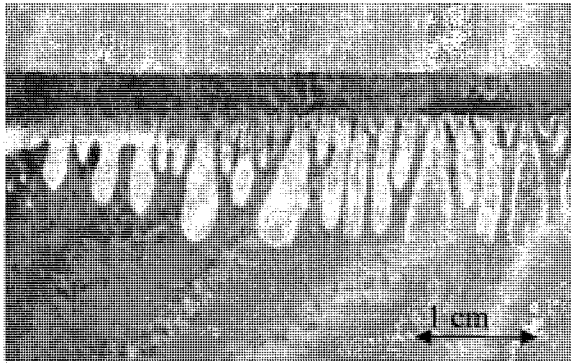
Appearance of cavities in the adhesive layer due to joint clamp been removed before adhesive solidification¹⁴⁶.
